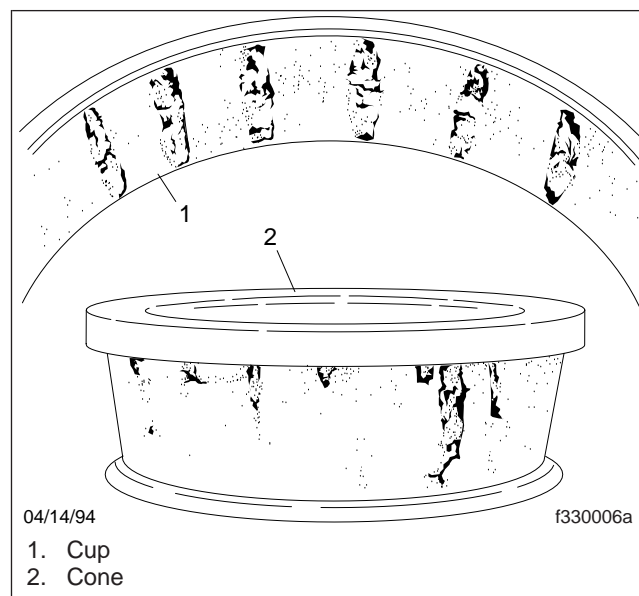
, Spalling (Flaking) of Wheel Bearing Assembly
